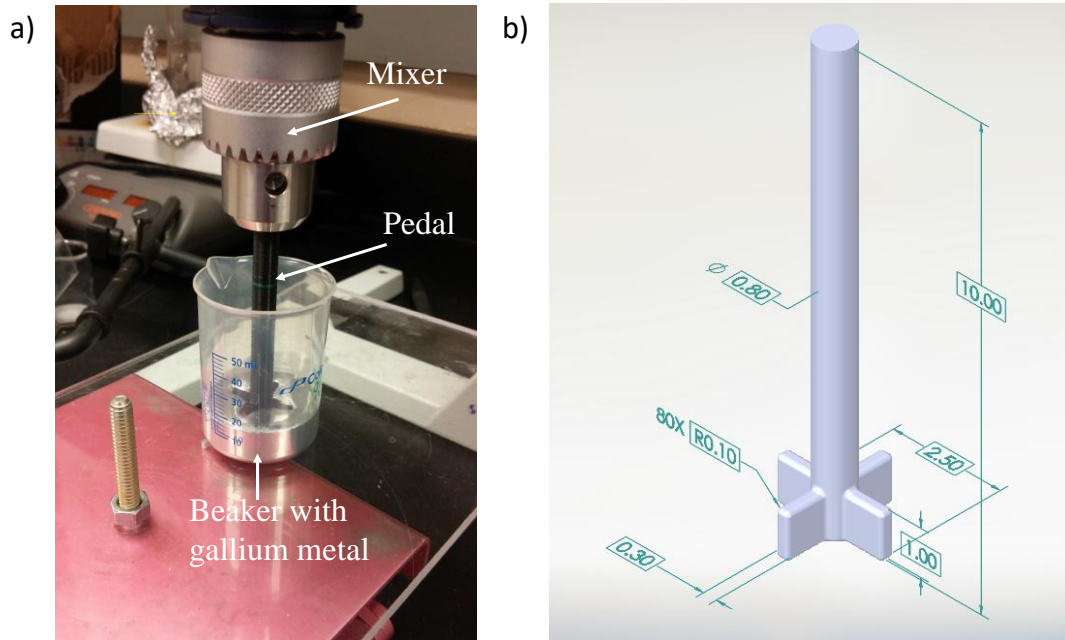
Setup for preparation of gallium metal foam: (a) mixing arrangement of liquid metal, (b) isometric view of the impeller used for mixing gallium (all the dimensions are in cm). Note that all edges on the cross-shaped impeller have fillets of 0.10 cm radius.
